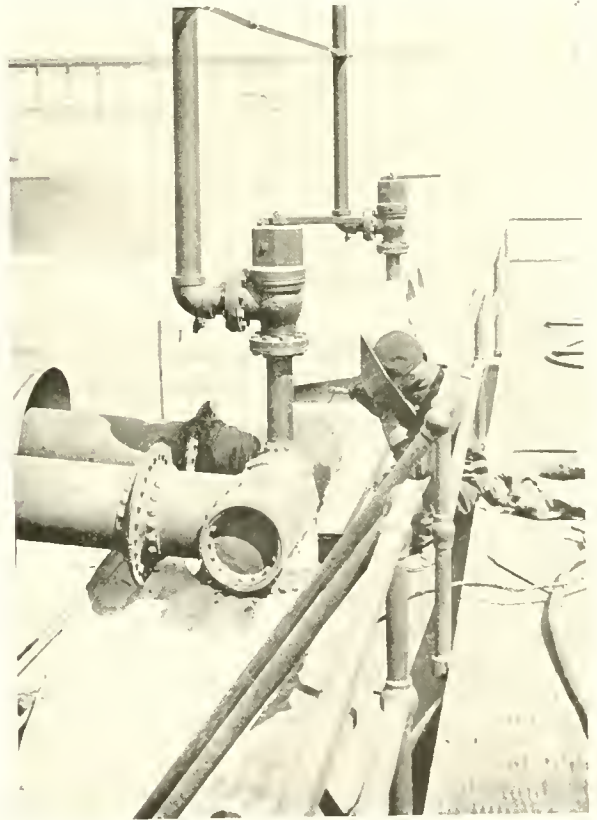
Electric Arc Welder used by the Standard Oil Co. to caulk leaks in vapor lines and oil stills. The vapors are very inflammable and every joint must be absolutely tight, hence welding is used in addition to riveting. (See Fig. 73)
